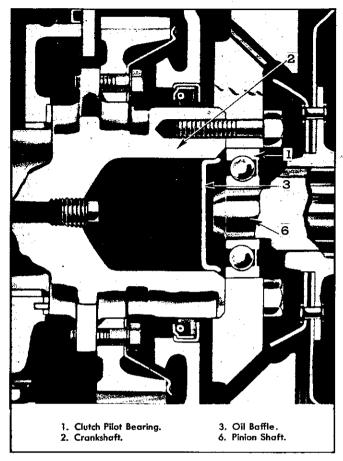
Grease Lubricated Pilot Bearing Installation.
